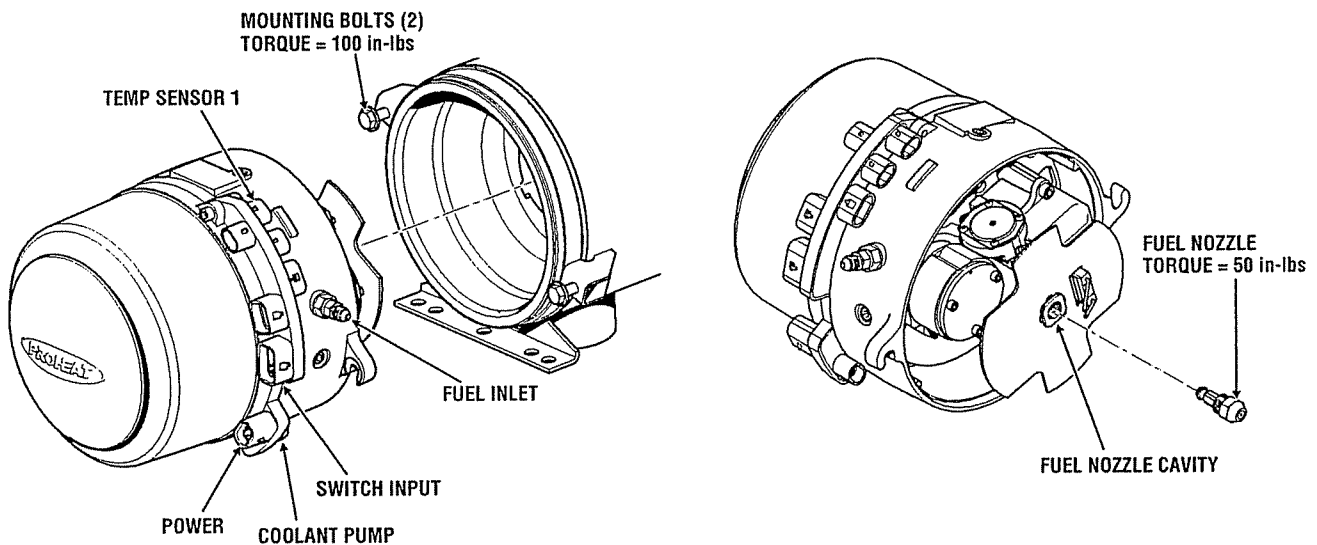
Burner Head Removal and Fuel Nozzle Removal
